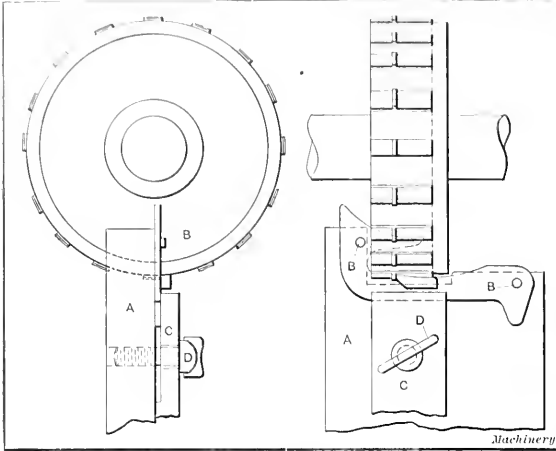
Details of the Milling Fixture used in finishing the Computing Machine Lever
